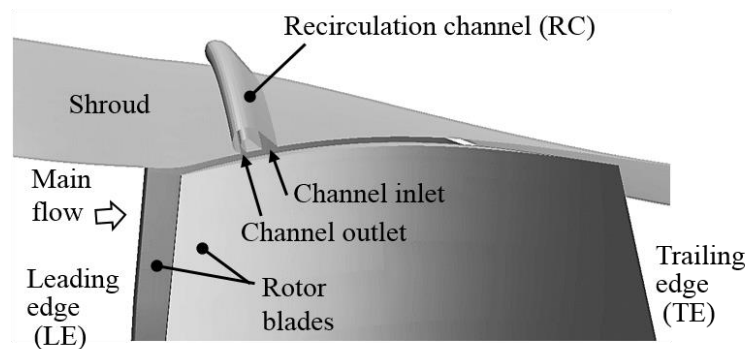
The concept of the recirculating type casing treatment over the rotor blade tip clearance.
